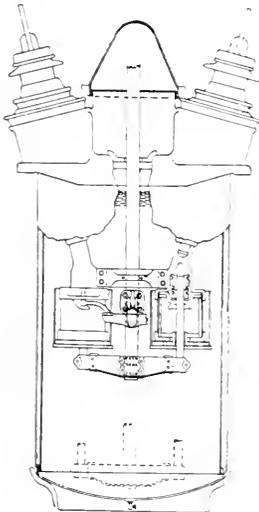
Internal Arrangement of 800-amp., 73,000-volt Oil Circuit Breaker
